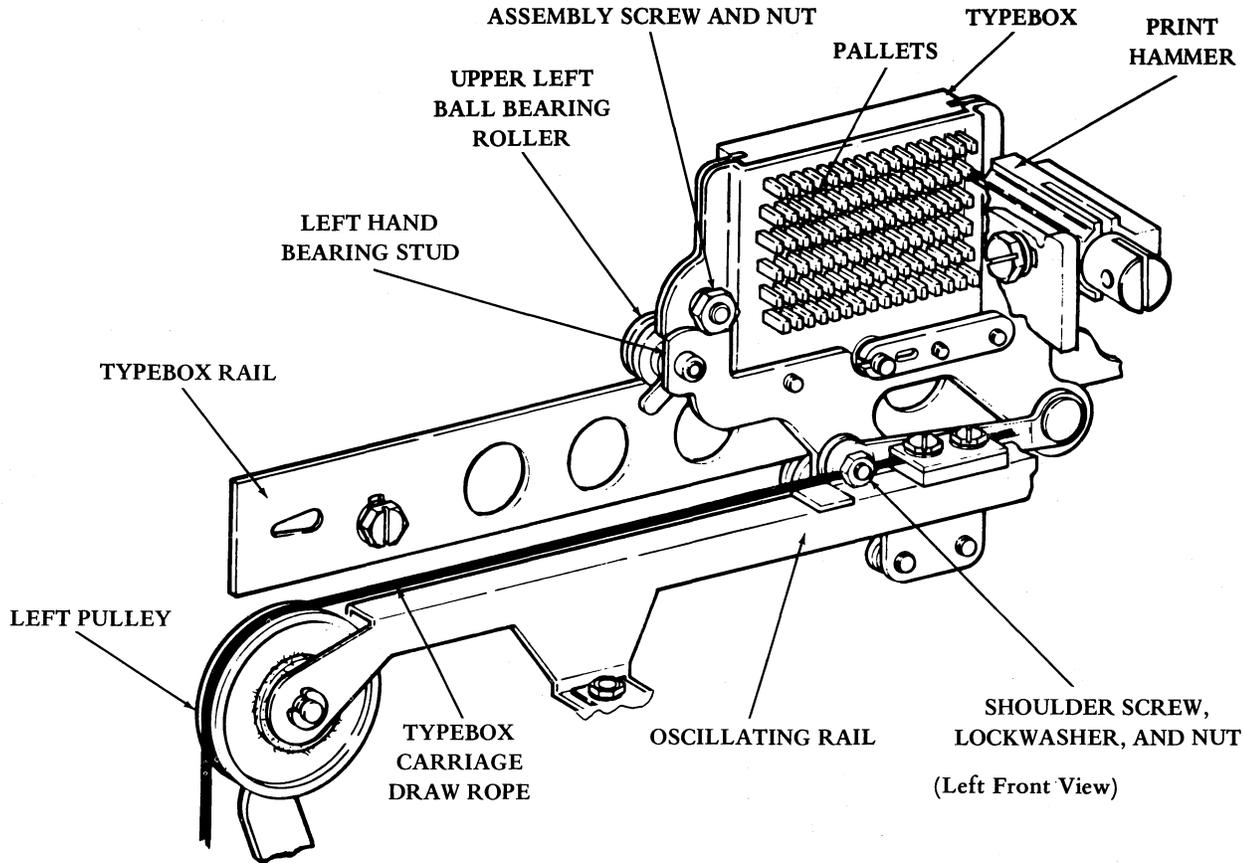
Typebox, Typebox Carriage and Oscillating Rail
